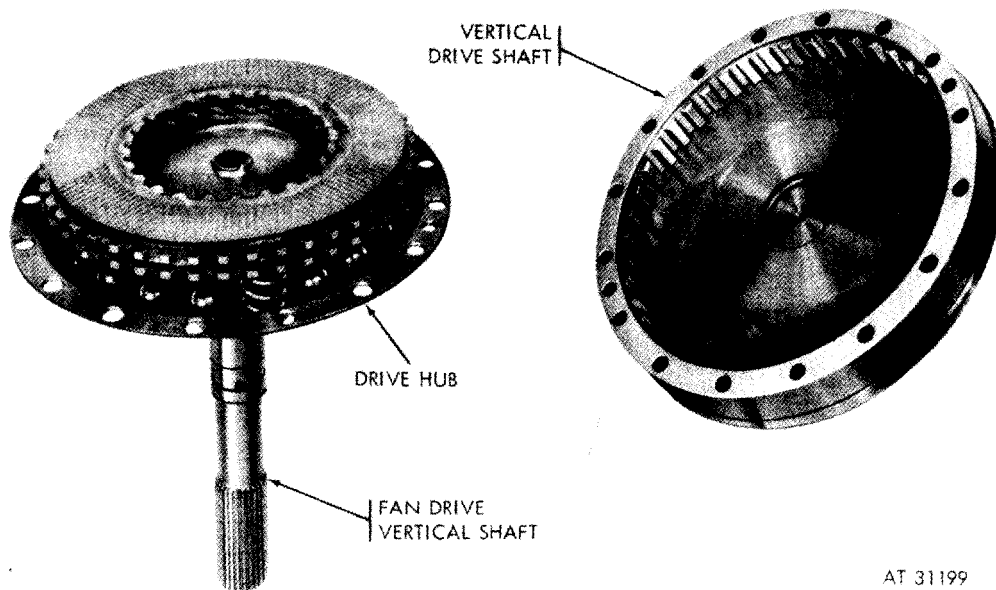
Separating or positioning fan drive hub and vertical drive shaft (mechanical clutch).
